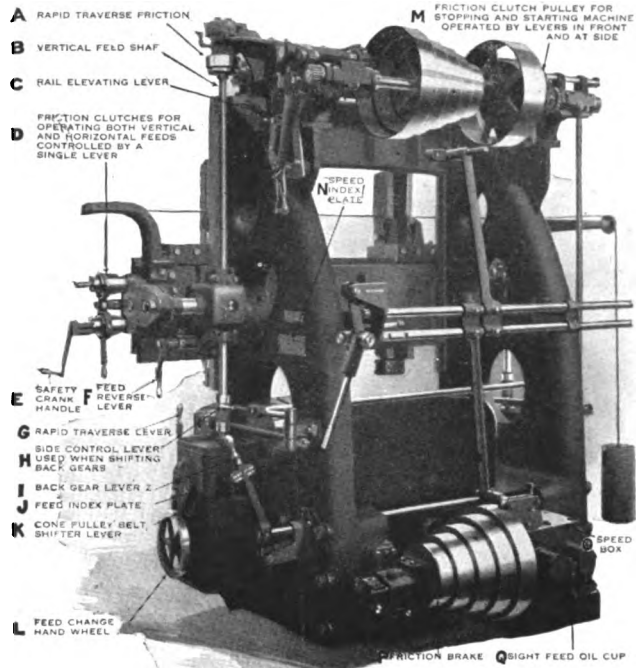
REAR VIEW OF 54 in. (1372 mm.) VERTICAL BORING AND TURNING MILL, SHOWING CONE PULLEYS AND MECHANICAL BELT SHIFTER
